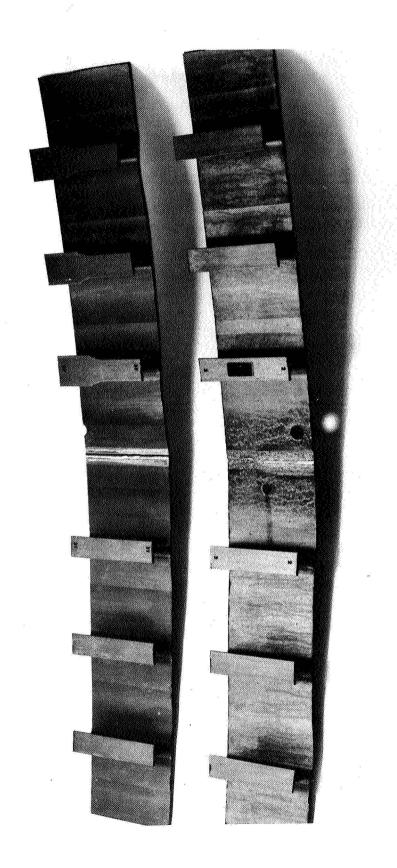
Welded Configuration Section 0.23 Inch Thick, with and Without touch-up Treatment - 24 Hours Salt Spray
